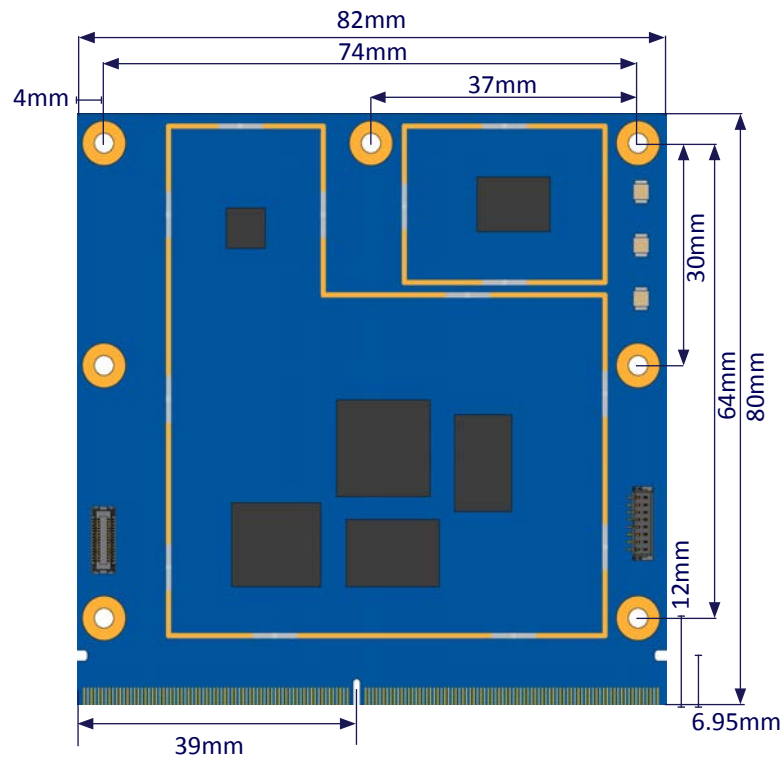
Dimensions of the VIA SOM-7000 module (top I/O)
